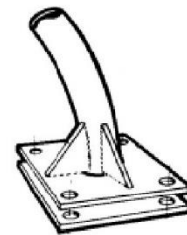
Roll Cage Mounting using Doubler Plates Note Gussets
